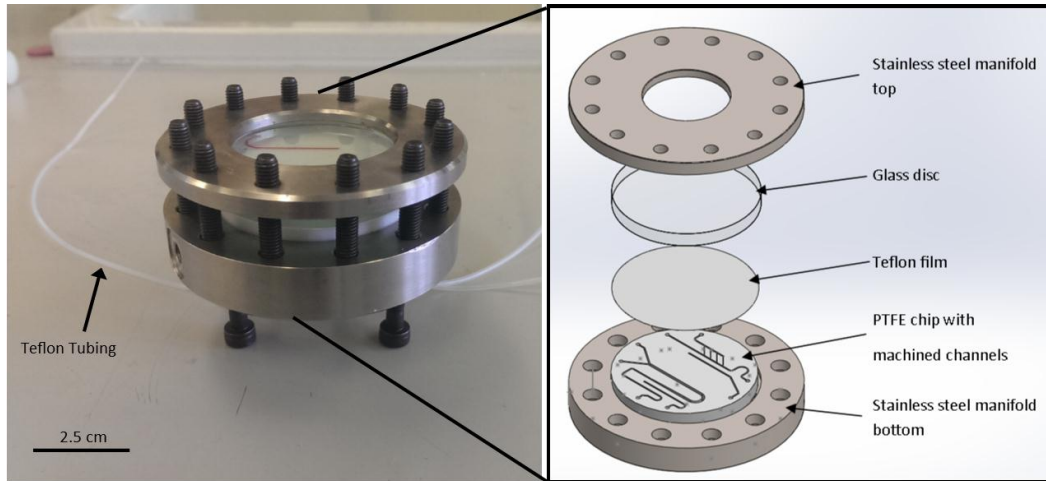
Image of the manifold used to create sealed PTFE devices with a diagram of the parts of the manifold exploded from the image. Two stainless steel plates are placed either side of a glass cover plate, Teflon film and a PTFE chip. Bolts are used to compress the film and glass against the PTFE creating a seal. Finger tight fittings are connected to the underside of the manifold to allow Teflon tubing to connect to inlet and outlet holes that are drilled through the PTFE chip.
